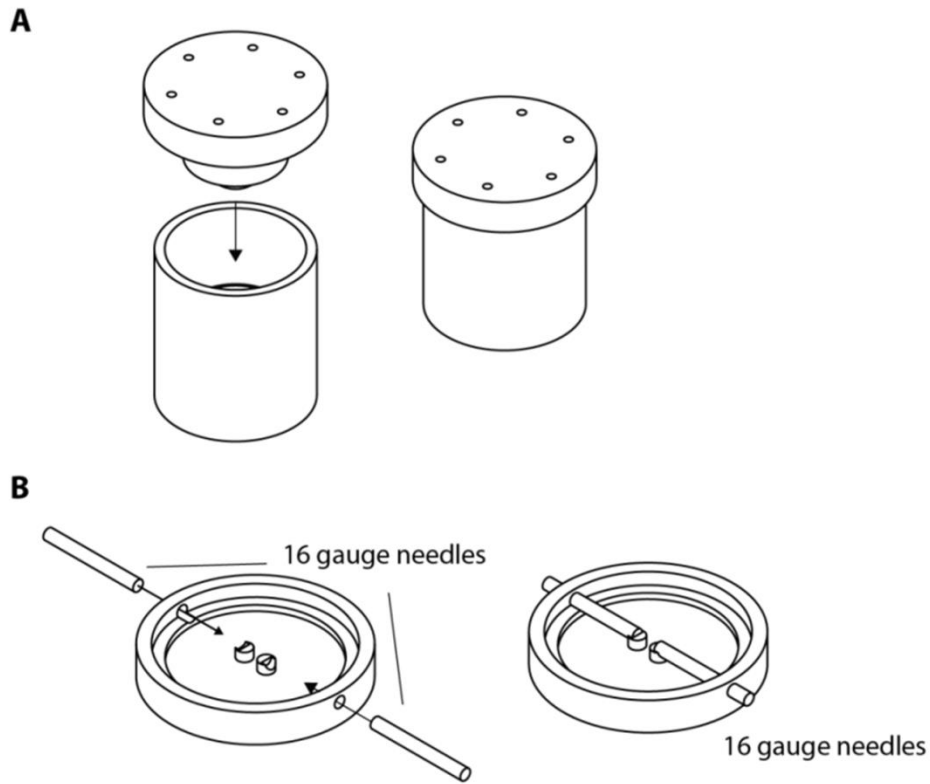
Design of the molds for the inverter. (A) Mold for the cylindrical wall-membrane assembly. (C) Mold for the top and bottom flat faces with internal channels for flow of air.
